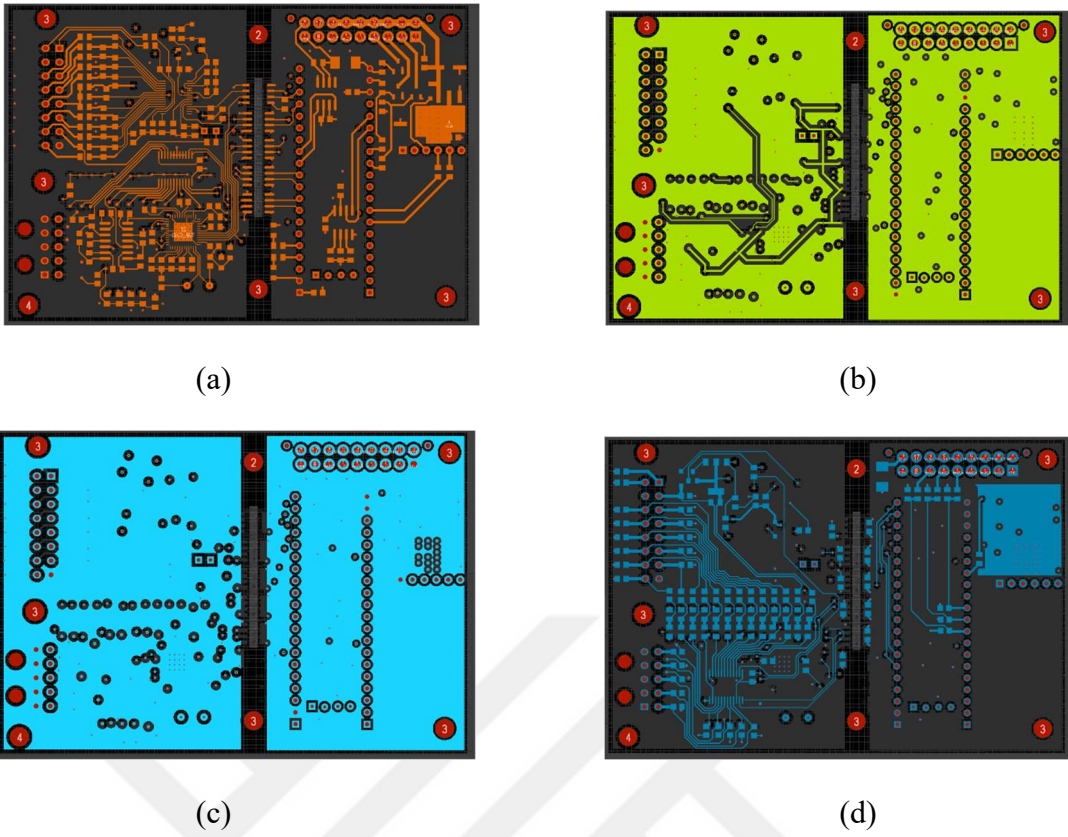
(a) PCB top layer. (b) PCB second layer. (c) PCB third layer. (d) PCB bottom layer.
